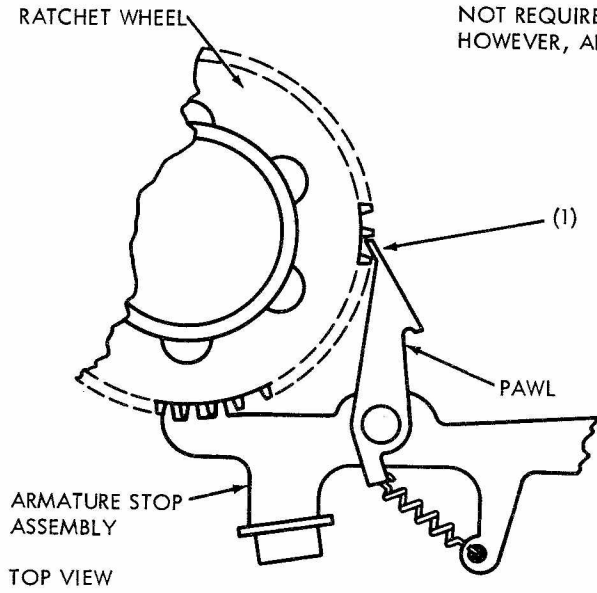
Tandem Message Identification Module, Stepping Switch Assembly
